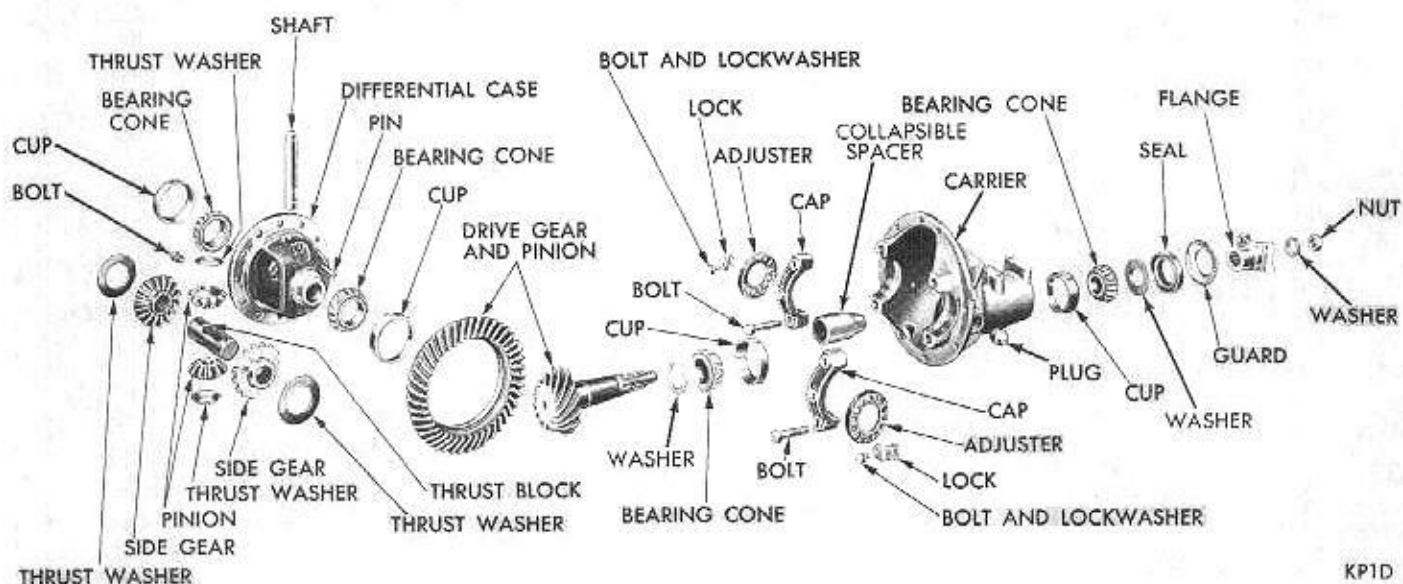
Differential Carrier Assembly (Large Stem Step Pinion)
